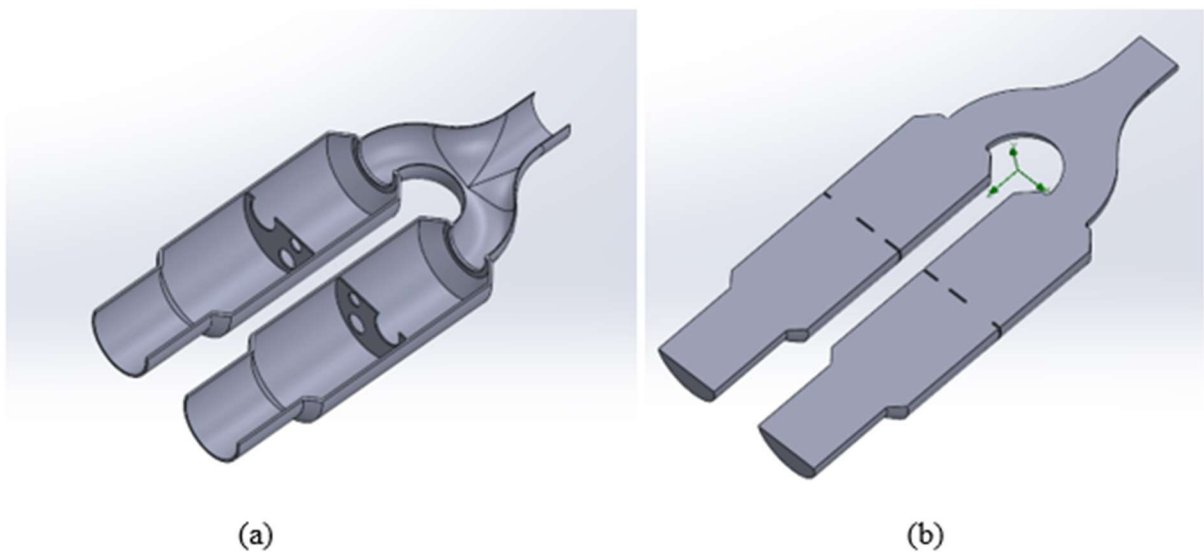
(a) Cut section of the design-1.2 with baffle plate 2 in SW (b) Cut section of the solid body for Ansys solver
